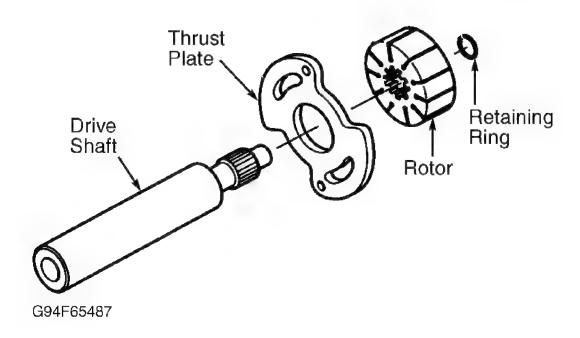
Assembling Drive Shaft Subassembly Courtesy of GENERAL MOTORS CORP.
